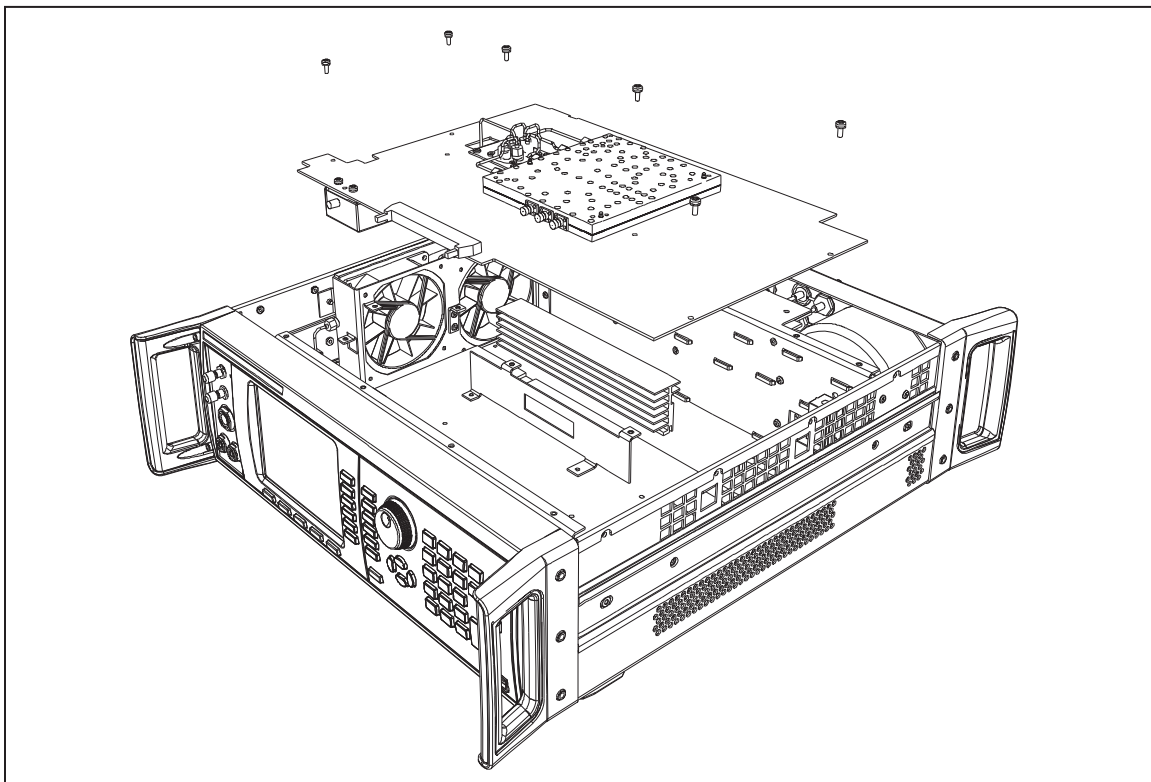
Removing the 27 GHz Control PCA (96270A)
